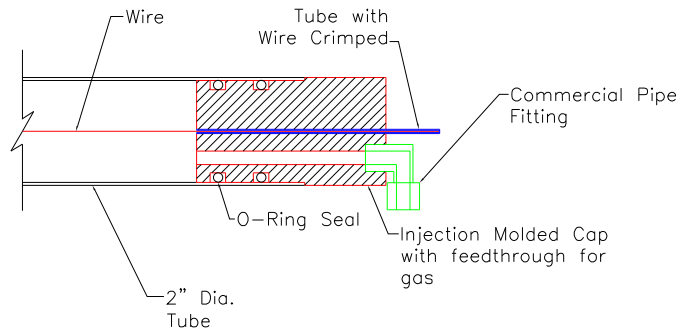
Schematic design of the veto chamber end-cap. The end-gap will be constructed of injection molded plastic with penetrations for the gas and wire feed-throughs. The end-cap will be double O-ring sealed against gas leakage and the resistive wire will be crimped in place under tension.
